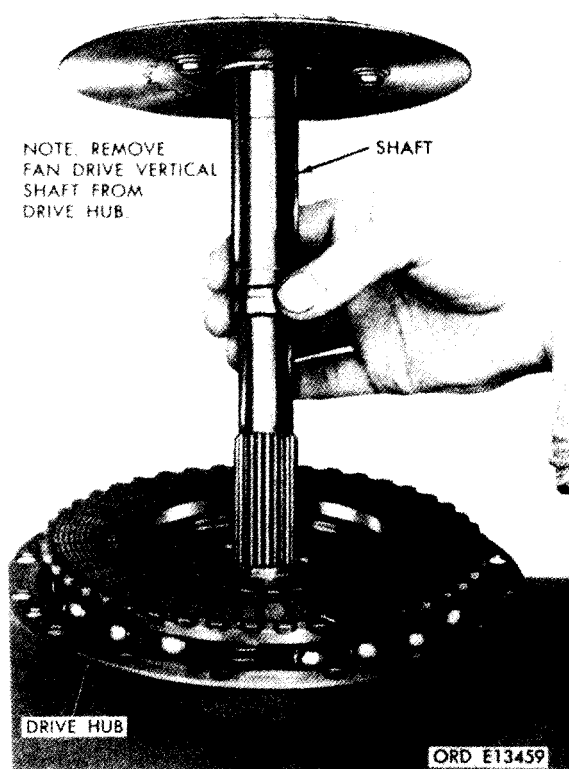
Removing or installing fan drive vertical shaft from fan drive hub (piston actuated clutch).
